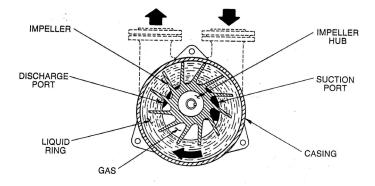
Liquid-ring pump operation. (Courtesy Graham Manufacturing Co., Inc.)
